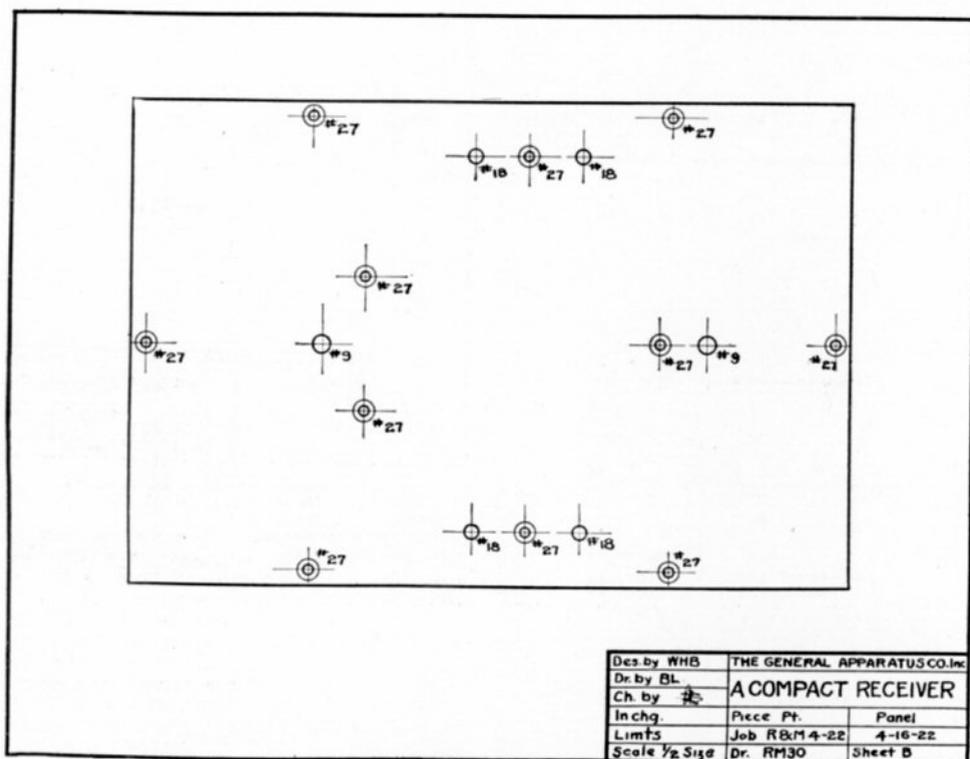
One-half scale drawing of the front panel, from which dimensions can be taken readily and transferred to the L. P. F.
